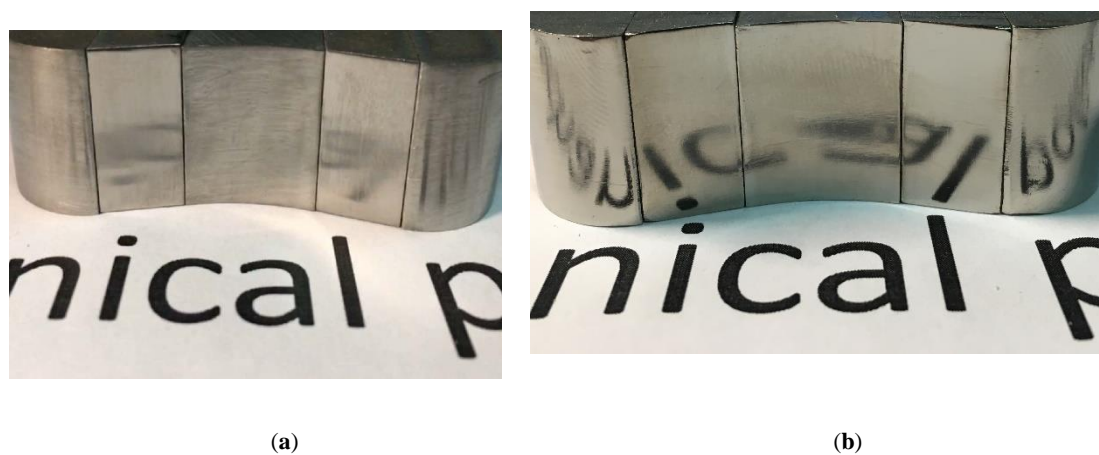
Workpiece surface: (a) original workpiece; and (b) finished workpiece.
